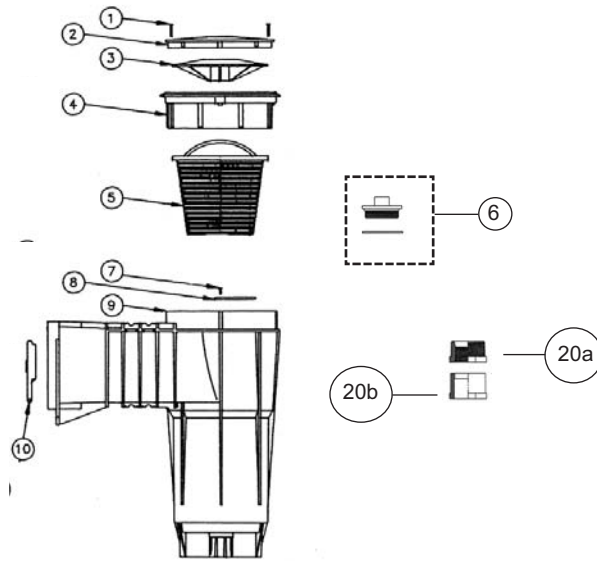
Gunite Mount - Skimmer Replacement Parts Breakdown:
